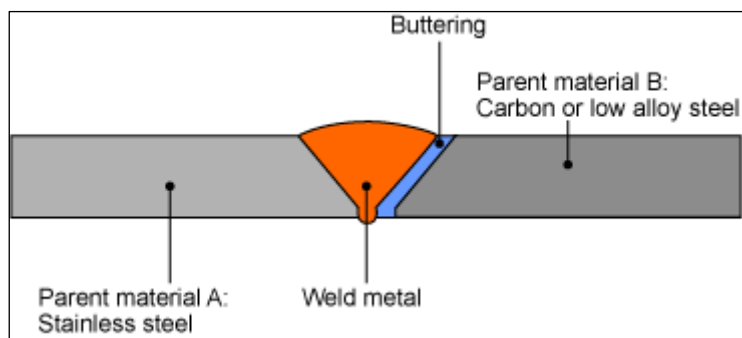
Pre-treatment of welds in form of buttering
